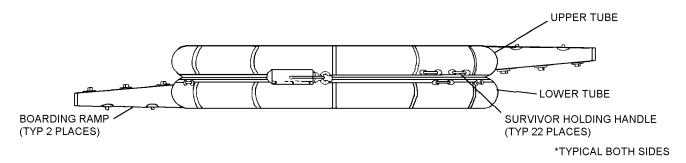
LRU-15/A Liferaft Assembly, Parts Nomenclature
